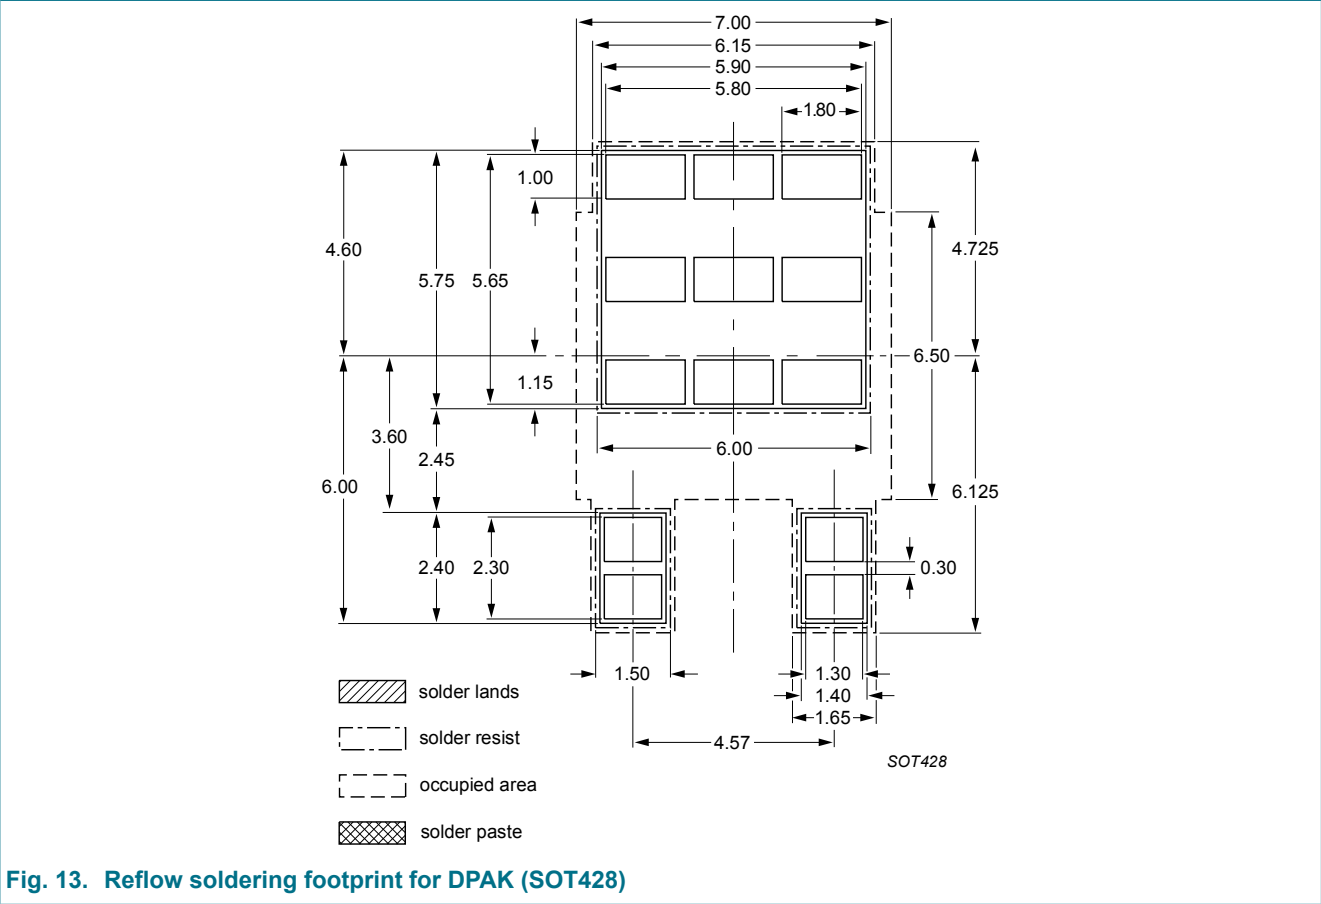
Reflow soldering footprint for DPAK (SOT428)
